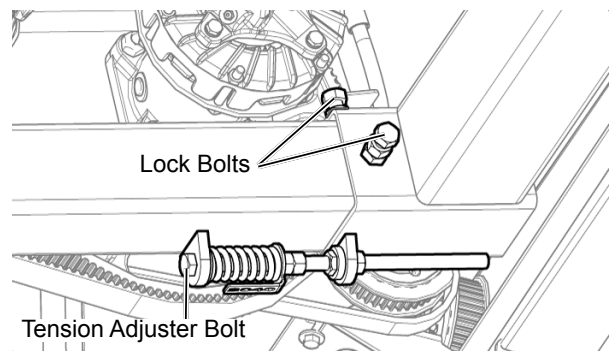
Left Draper 1st Drive Belt Tension Lock Bolts
